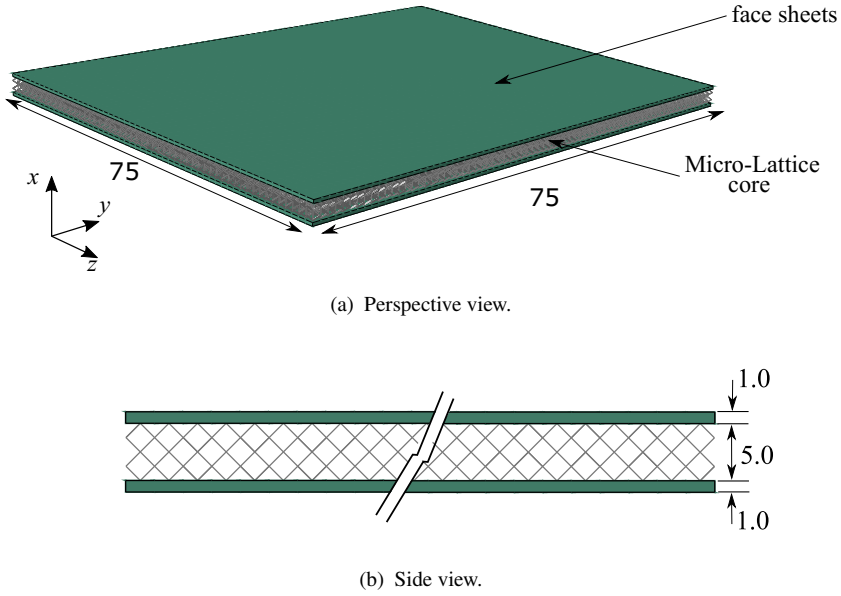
Geometry of the sandwich plate (all dimensions are in mm).
